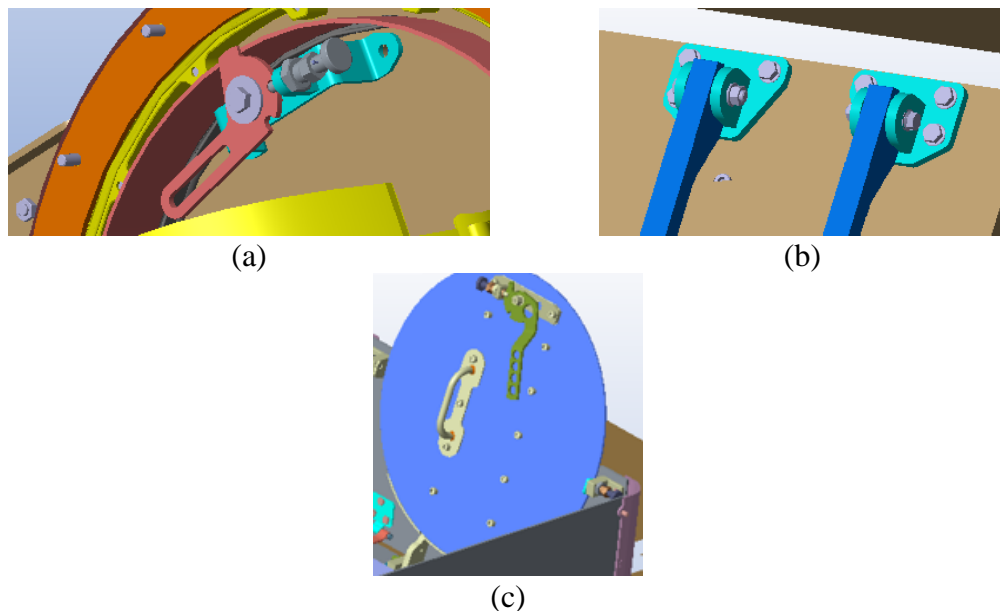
(a) Locking mechnism from inside the cockpit, (b) Hinges mechsimsim with ribs and (c) Hatch plate rest on the perimeter protection with the single plunger lock
